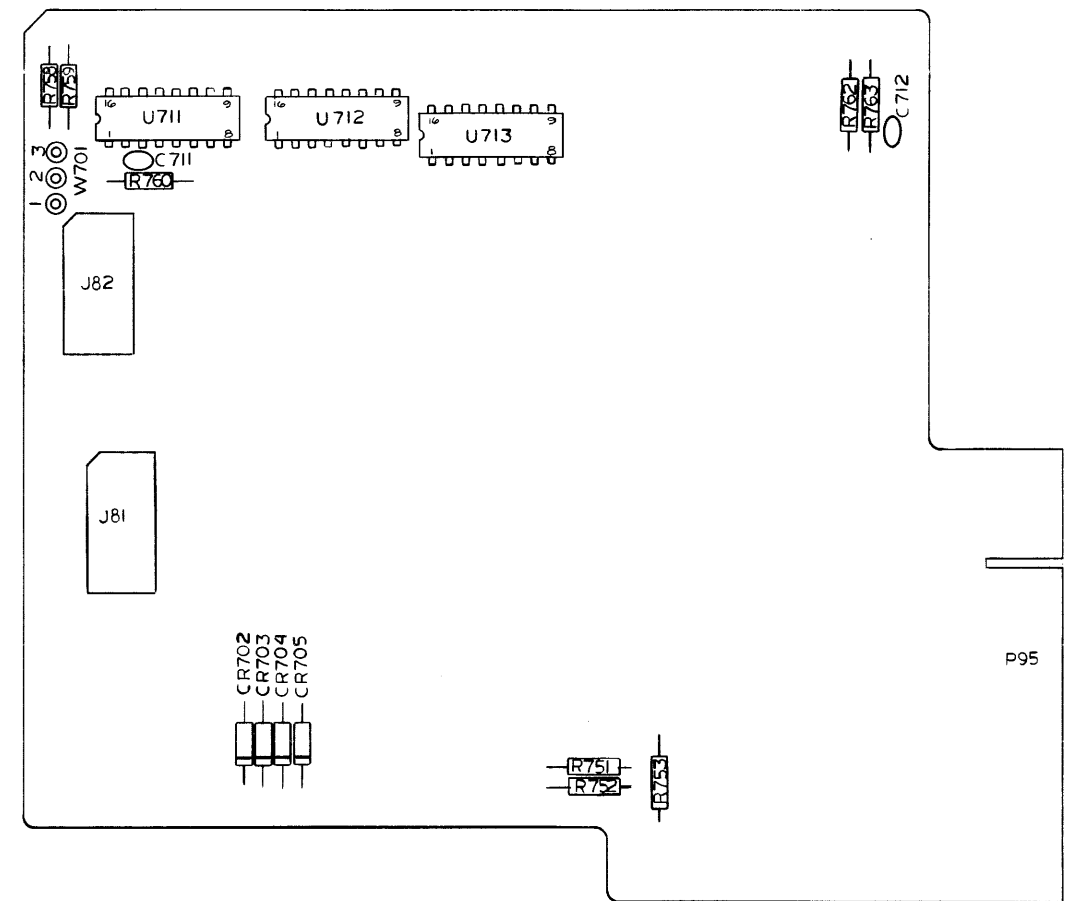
A10 Basic Remote Control Unit PCB Assembly , -11 Option
